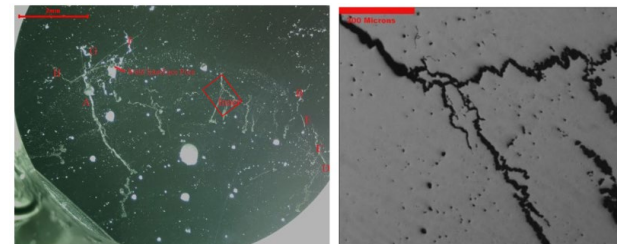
A206-0.2 Sc showing extensive cracking through and around the weld.
